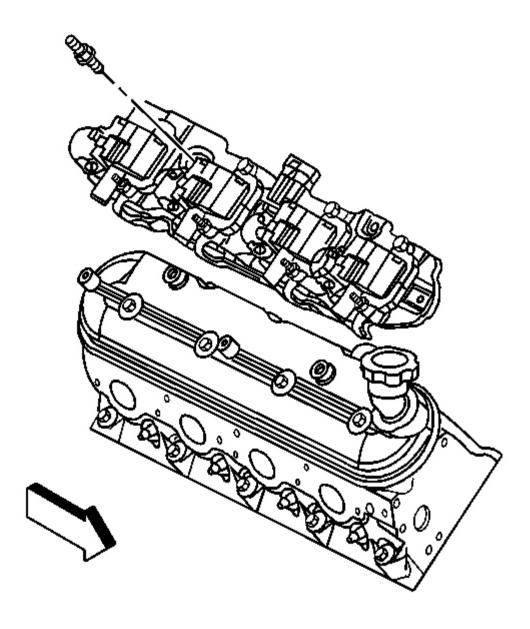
Right Ignition Coil Bracket & Studs Courtesy of GENERAL MOTORS CORP.
